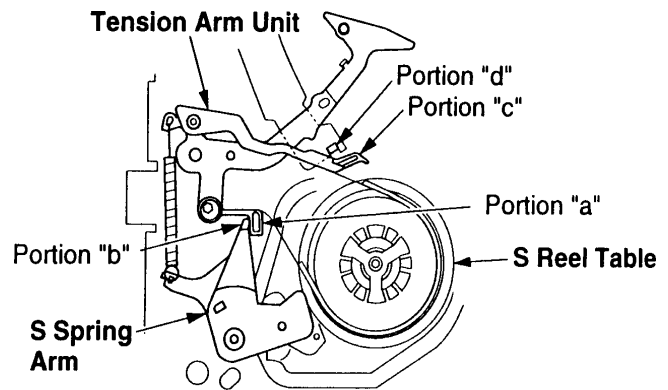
Full Erase Head/Tension Arm Unit/S-Spring Arm/S-Reel Table Removal
